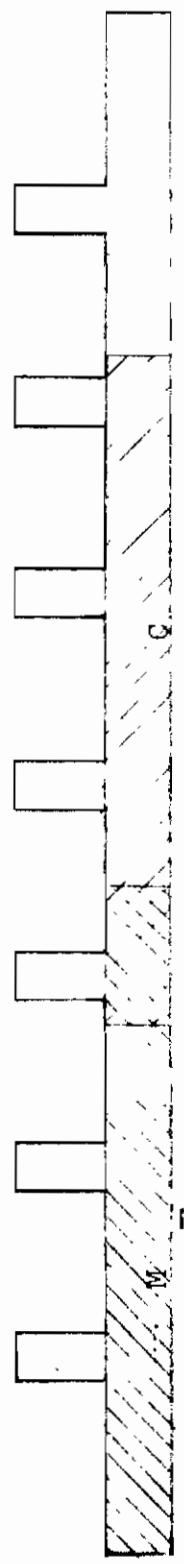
Locations of Tensile Specimens in 3-1/2x7-1/2-in. Extruded Bars.
